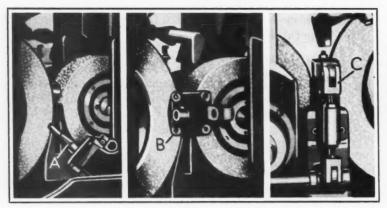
Three Views of Duplex Wheels Used on Centerless Grinder for Grinding Automobile Steering Knuckles
